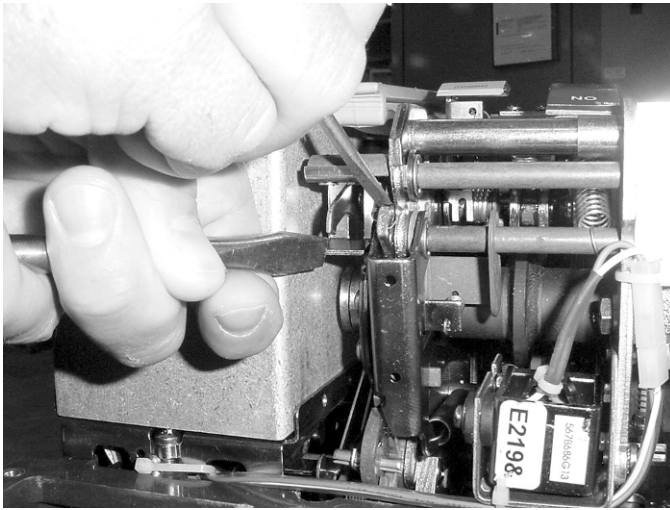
Rotating the close de-latch mechanism to release the charging pawl.
